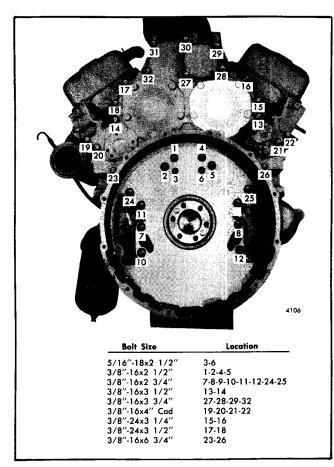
Flywheel Housing Bolt Sizes and Tightening Sequence (Operation 1)--8V Engine
